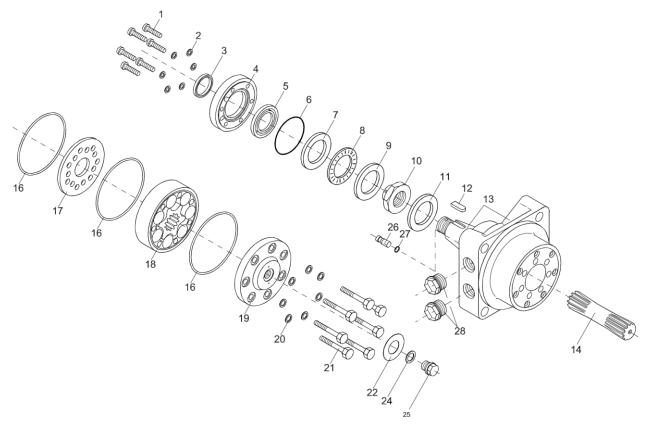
Exploded view OMR and OMR C, metric version Series 5 with separate spigot flange
